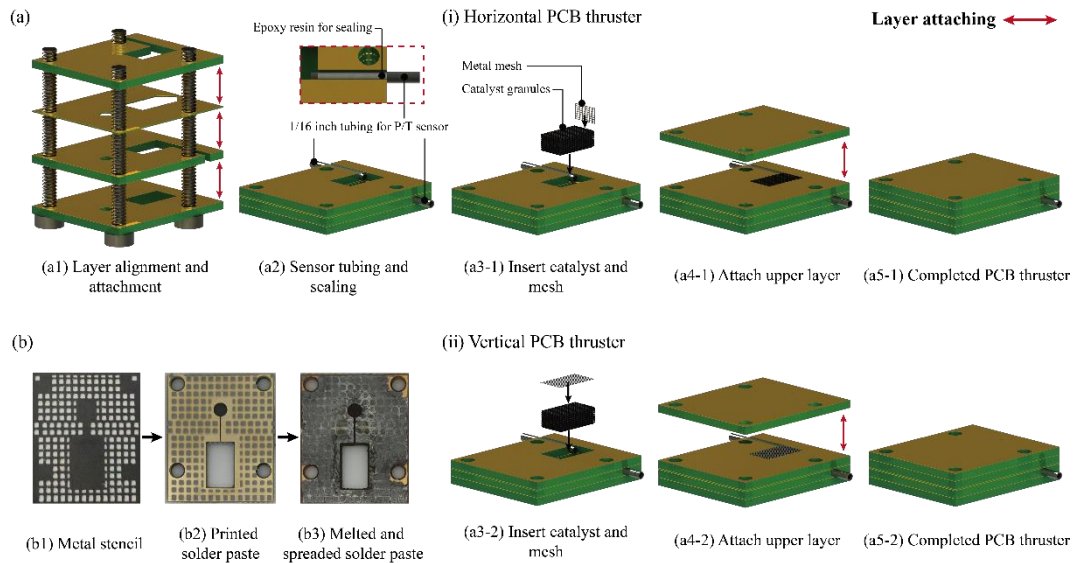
(a) Integration process for fabricating a microthruster. (b) Layer attachment process using the PCB SMT method.
